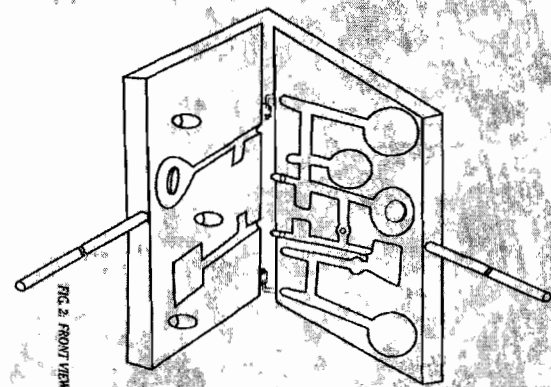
FRONT VIEW OF THE OPENED KEY BLANK MOLD
